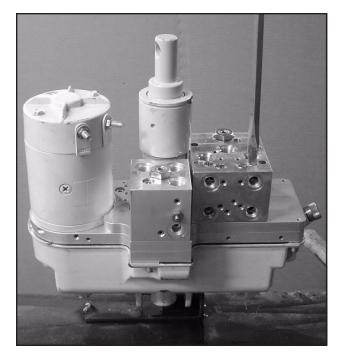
Using a Irage flat blade screwdriver loosen and remove Relief Valve Body.
